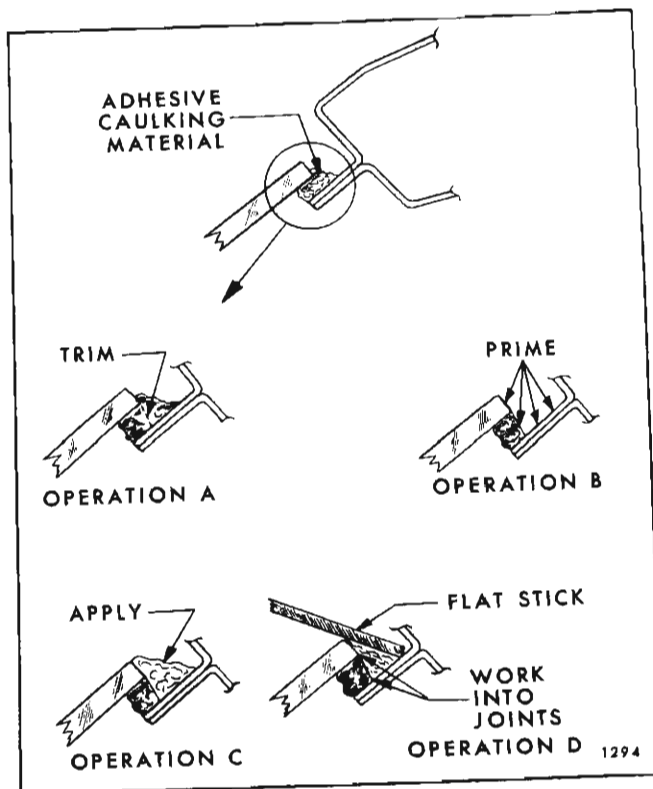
C13—Correction of Adhesive Caulked Glass Installation Waterleaks
